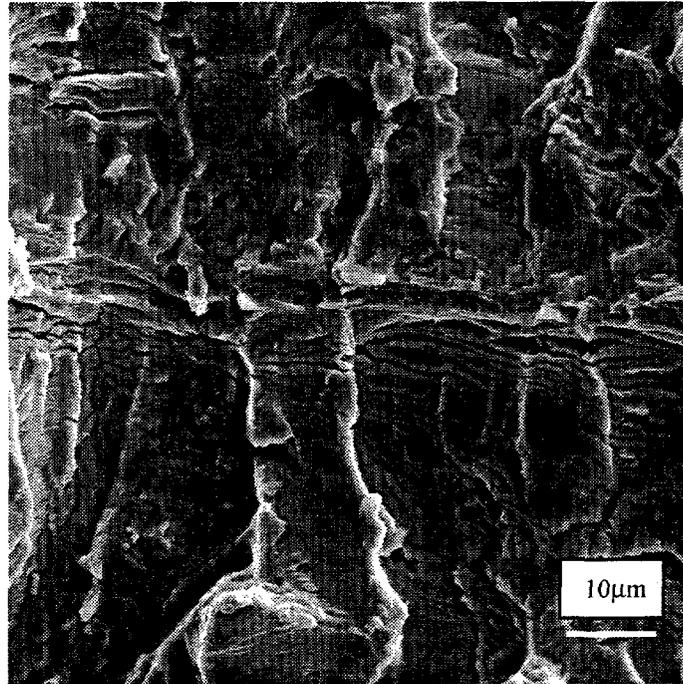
Fracture Surface of C44-14 - Precrack Tip Region
